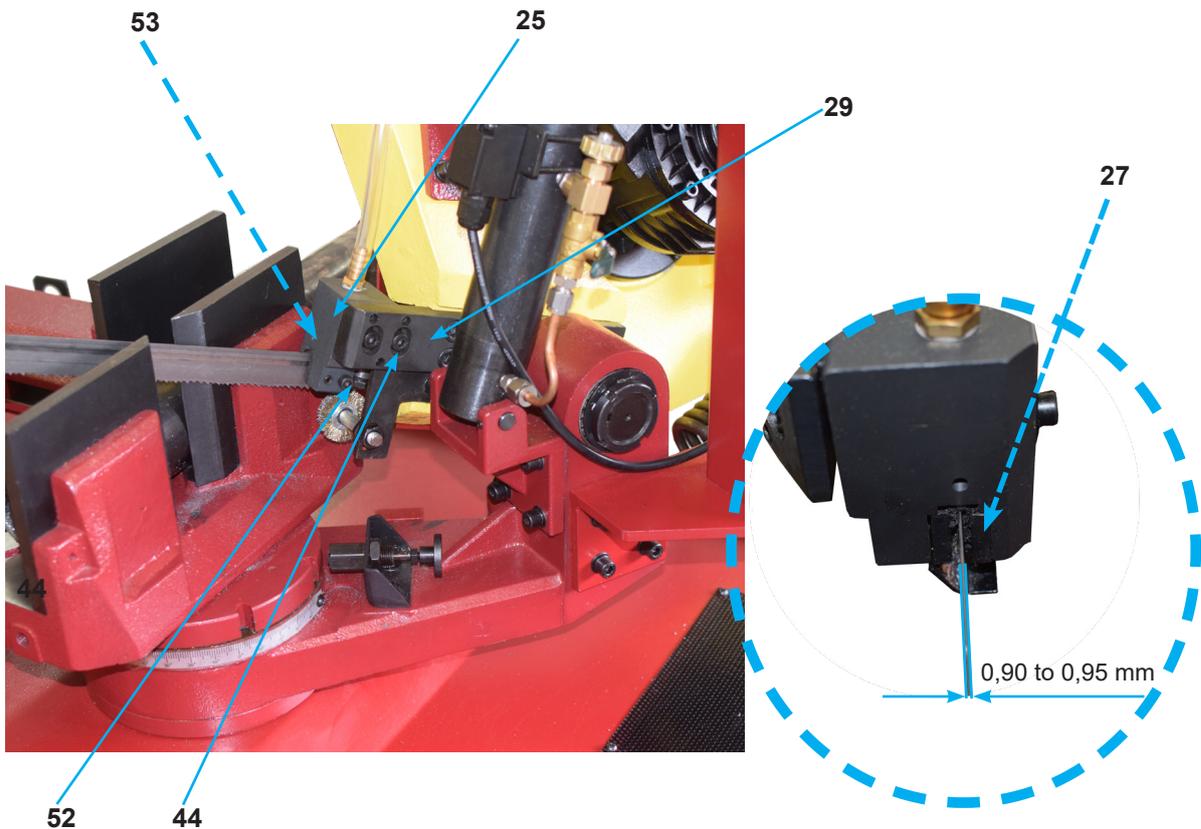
SIDE BEARINGS ADJUSTMENT
